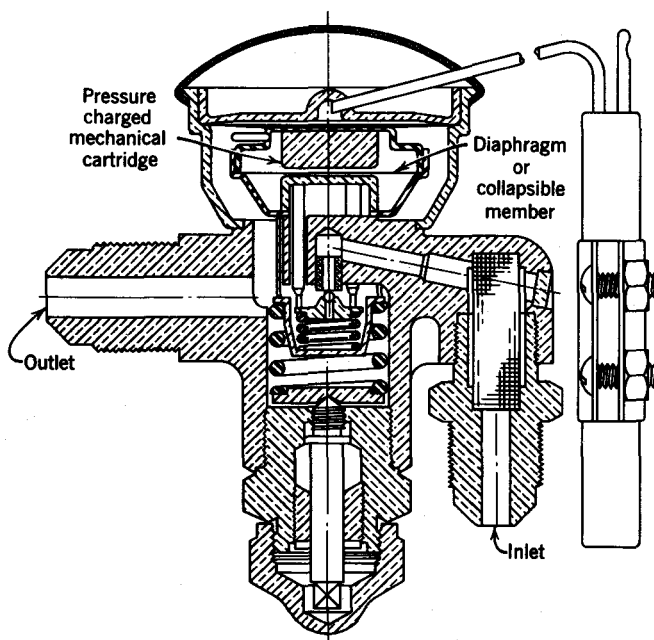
Cartridge-type pressure limiting valve. (Courtesy Alco Valve Company.)
